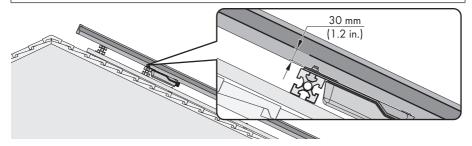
Minimum clearance of the inverter to the bottom side of the PV module
